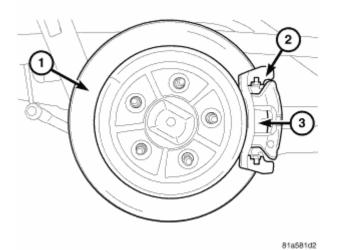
Rear Disc Brake Rotor Courtesy of CHRYSLER LLC
